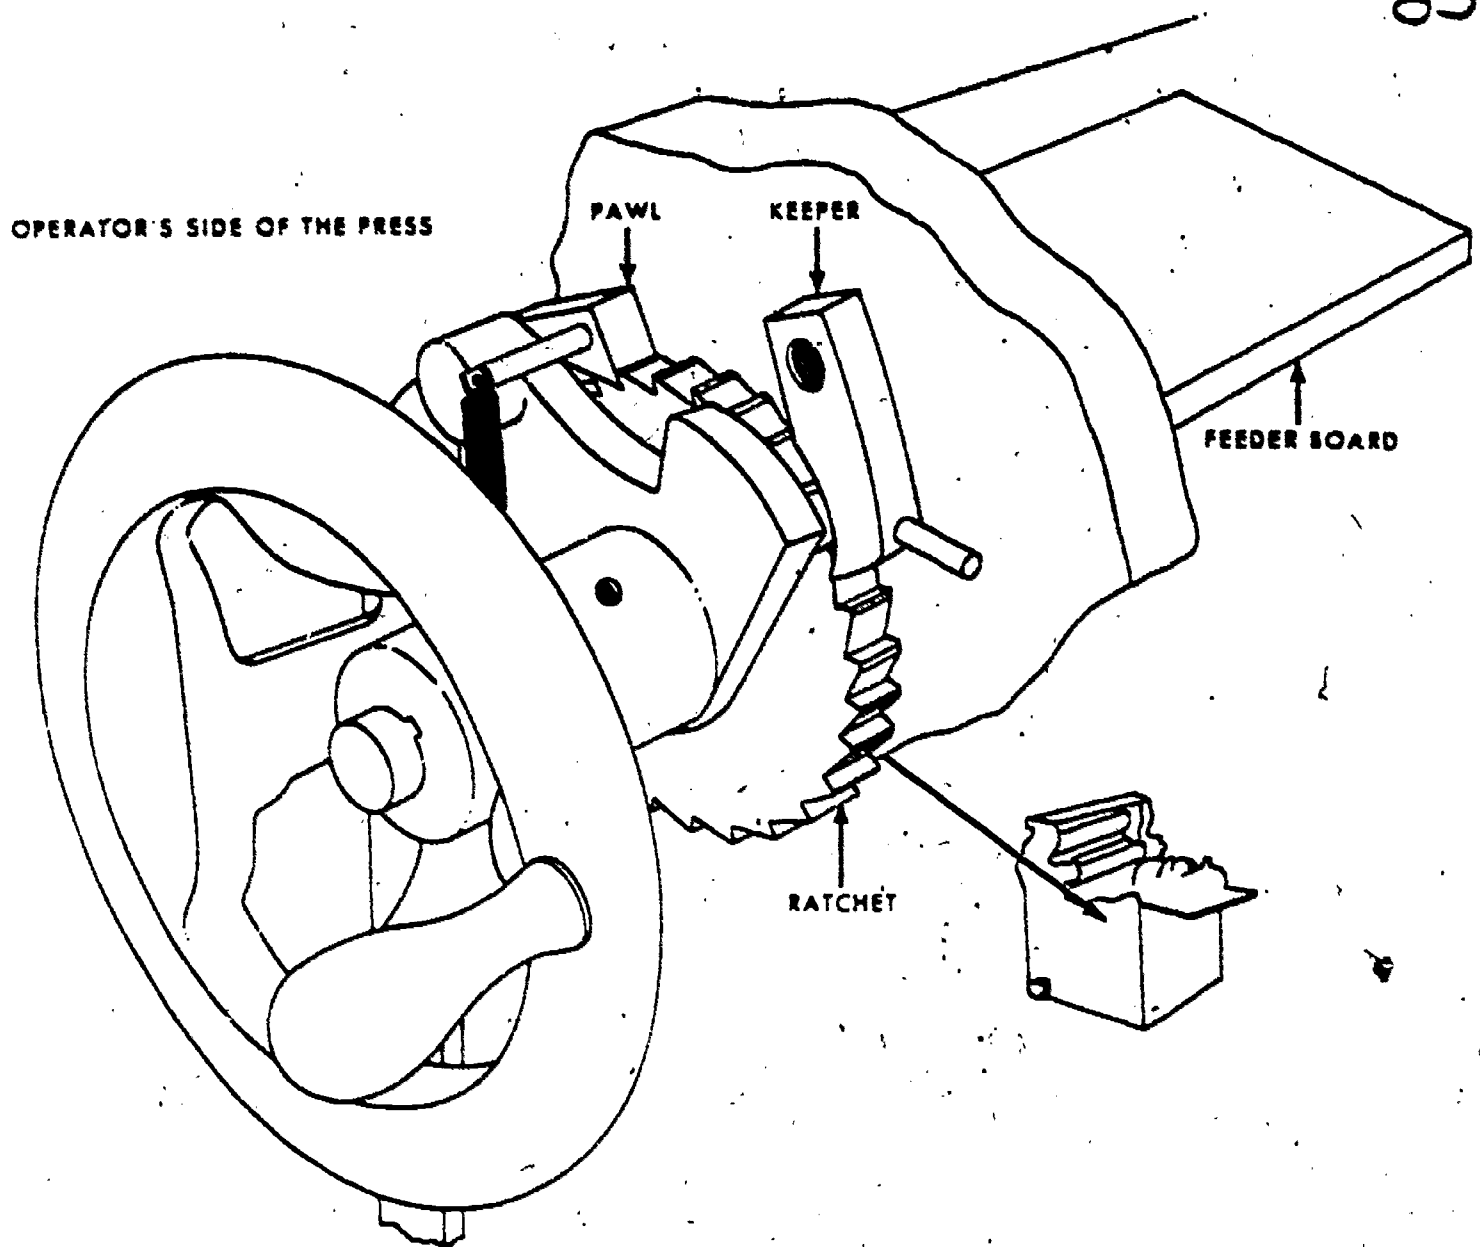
Handwheel for manually raising and lowering feeder board.
